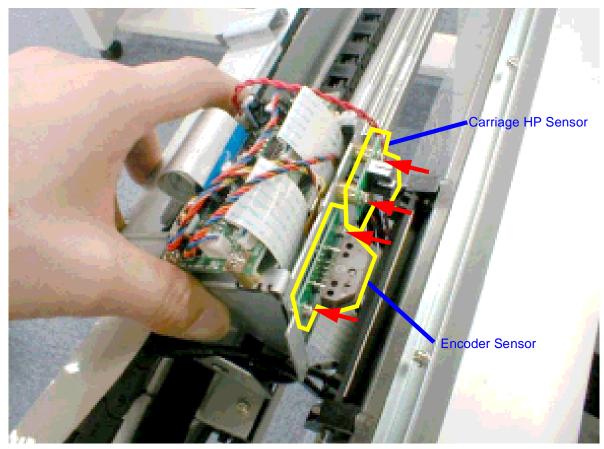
Removing the Carriage HP Sensor and Encoder Sensor
